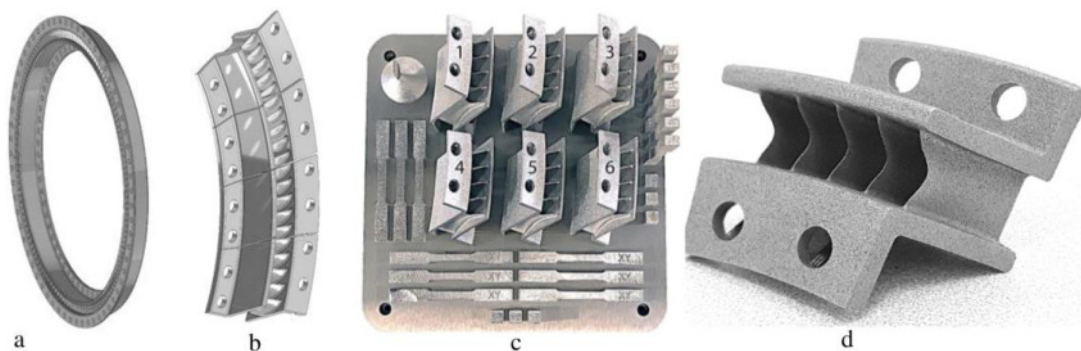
(a) OGV; (b) Four segments; (c) Printed segments on build plate; (d) Printed segment
